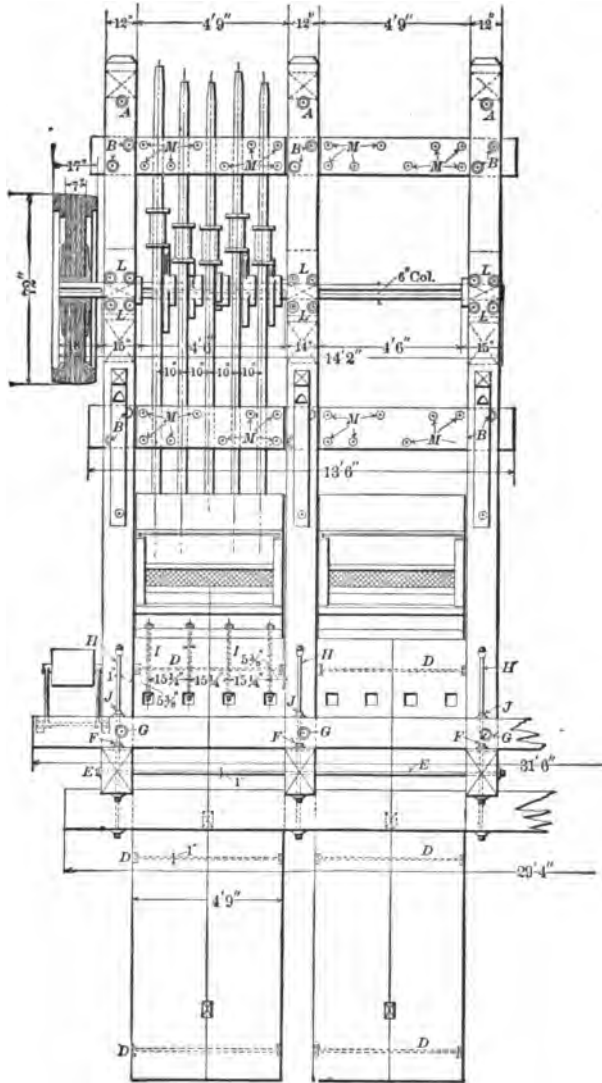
FRONT ELEVATION OF STAMP MILL.
